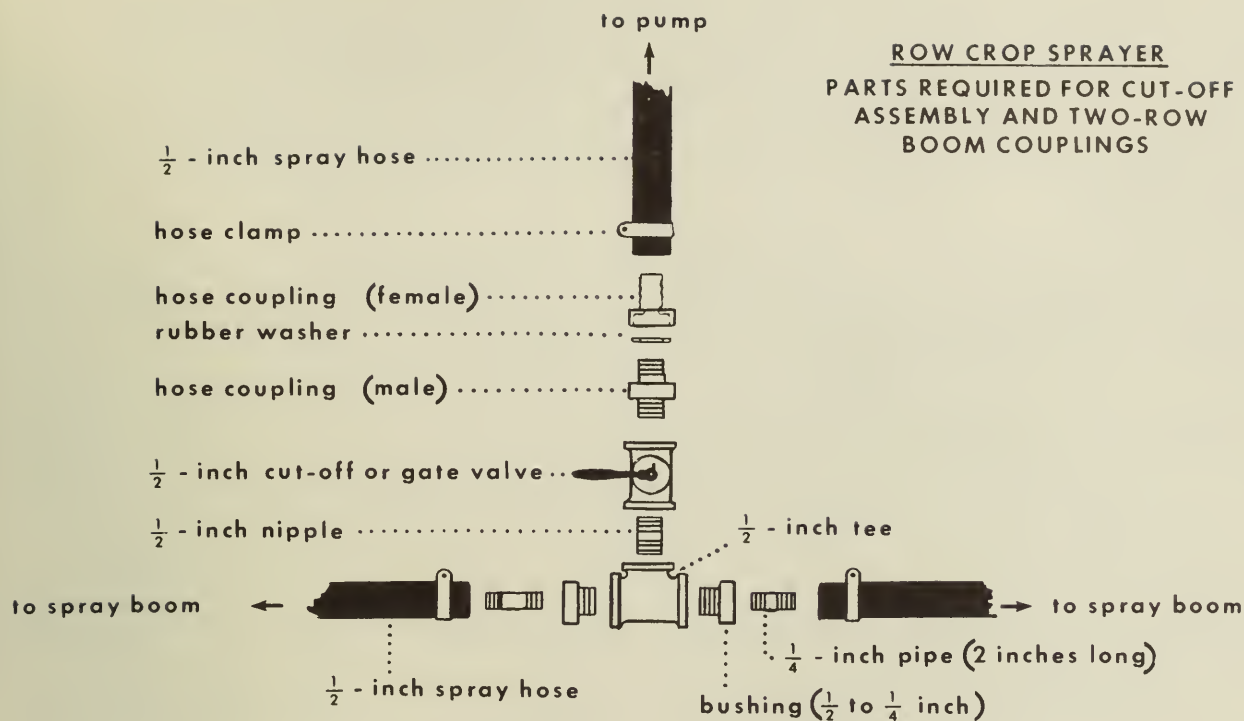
Parts required for cut-off valve assembly and two-row boom couplings.
